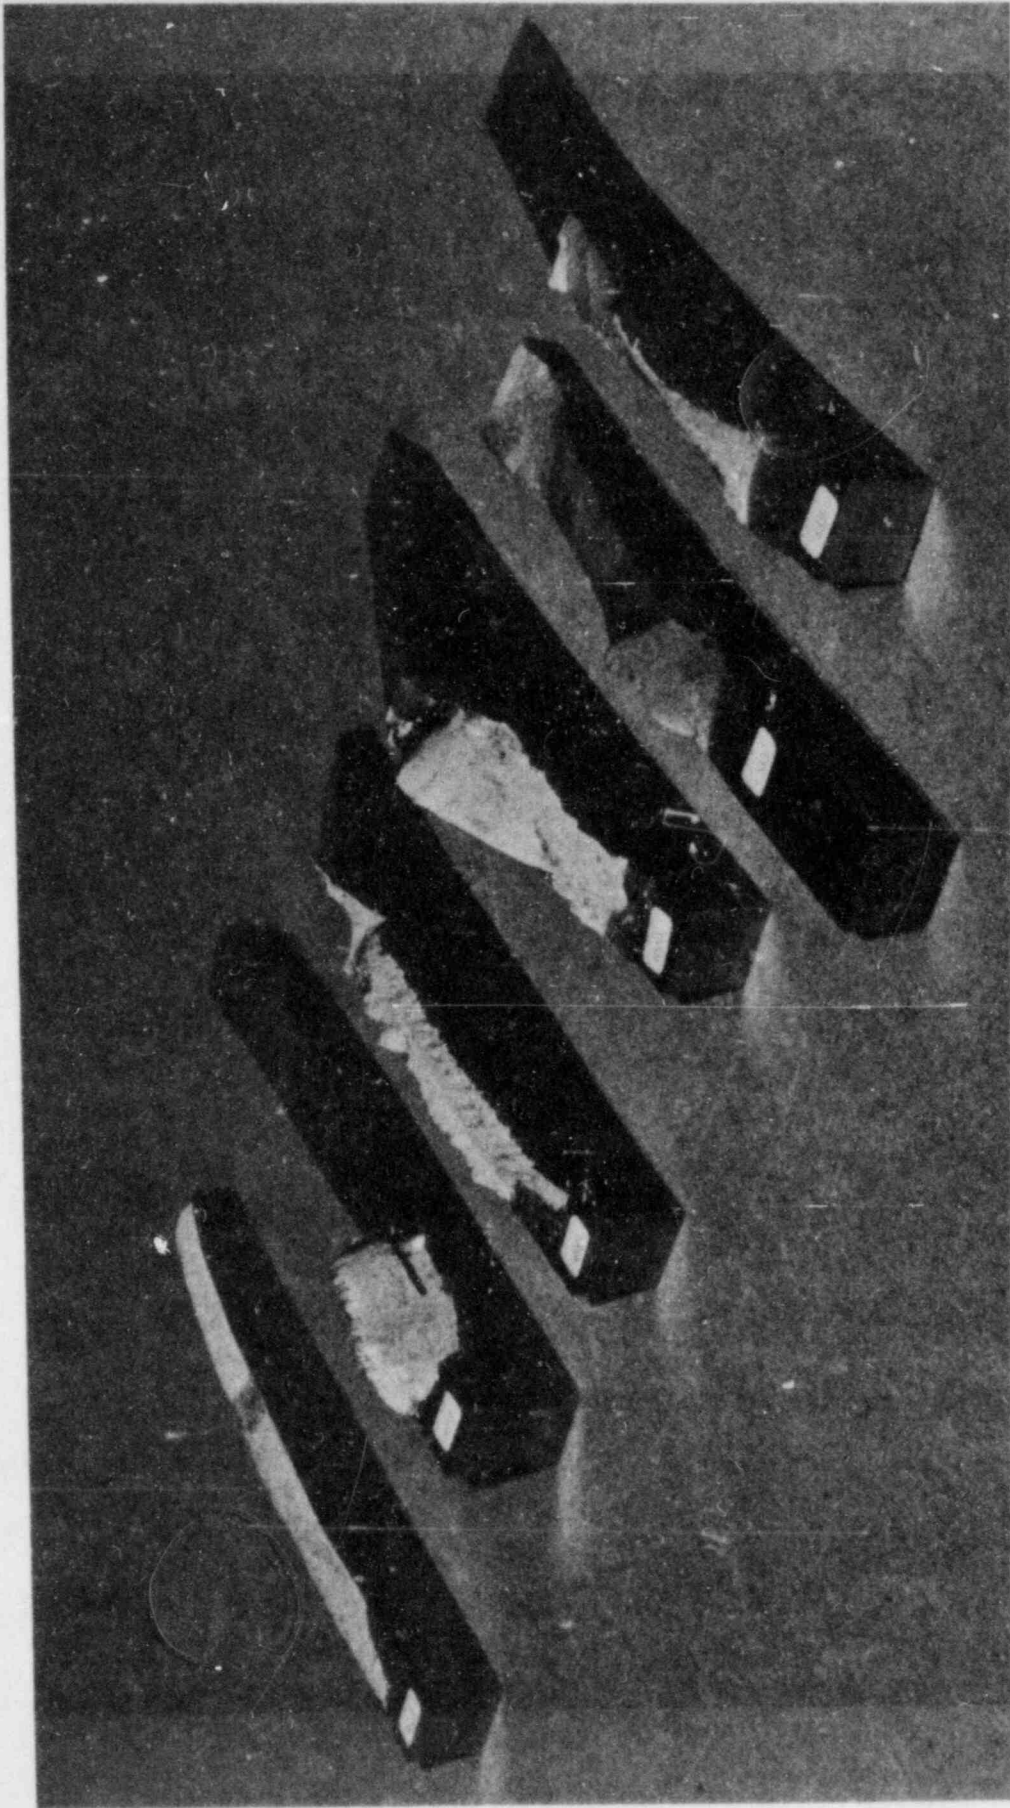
A240 Plate Welded with E316 Electrode Fracture Surfaces
